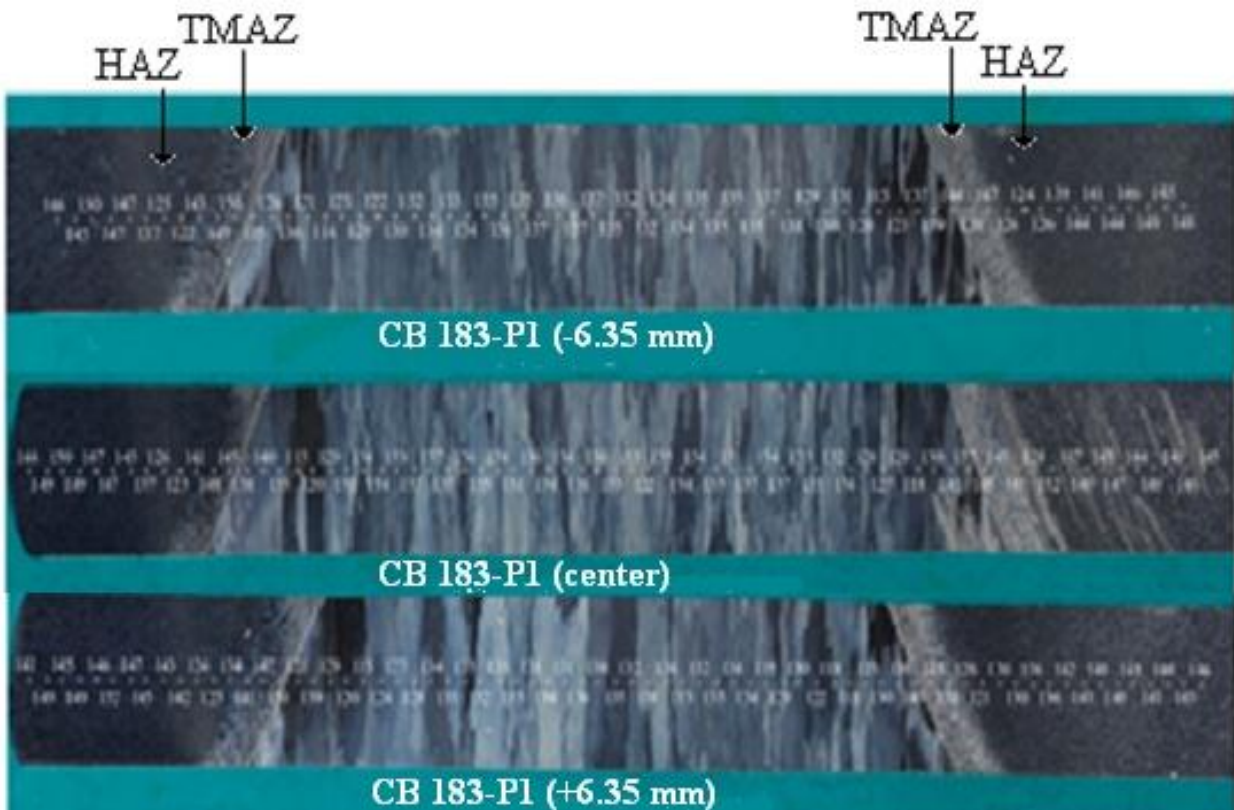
Cross-section macrographs of CB-183-P1 post weld heat treated plug welds of M5 plug major diameter side.
